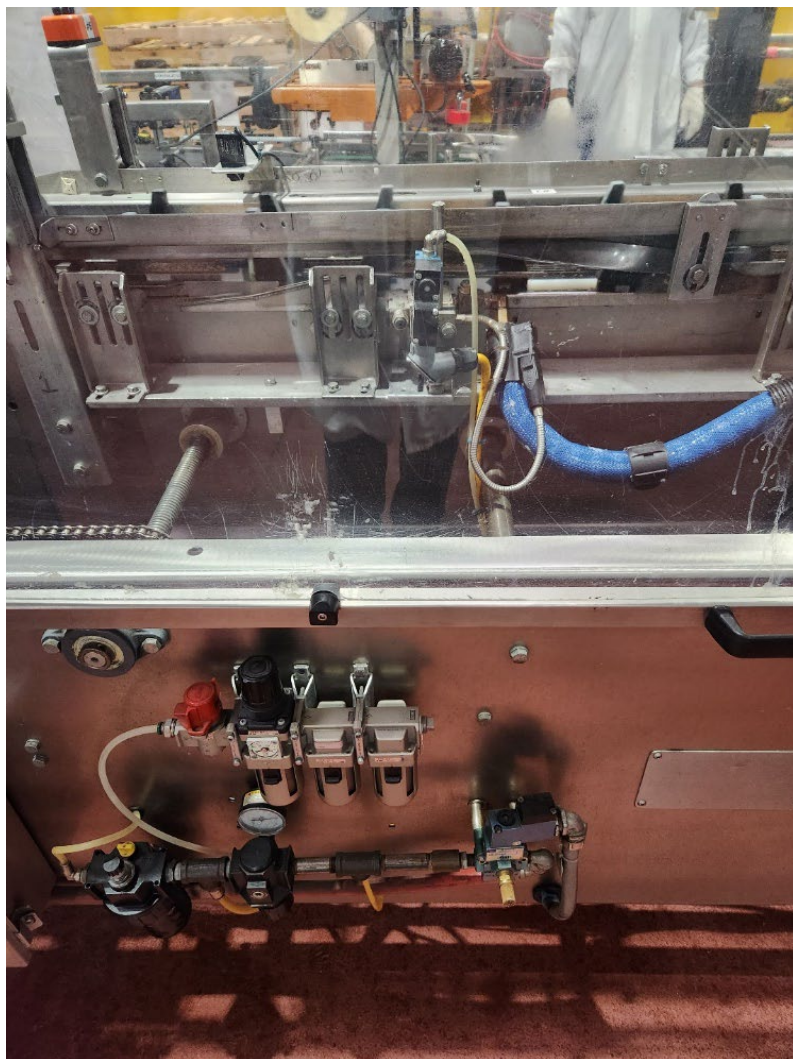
Typical packaging machine selected for AMS installation, with FRL and compressed air supply piping.
